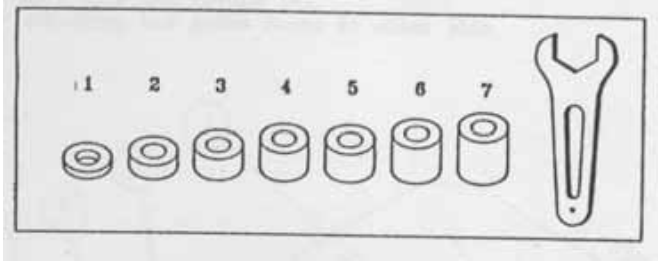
Accessories in Parts Box—Spacing Ring, Wrenches
